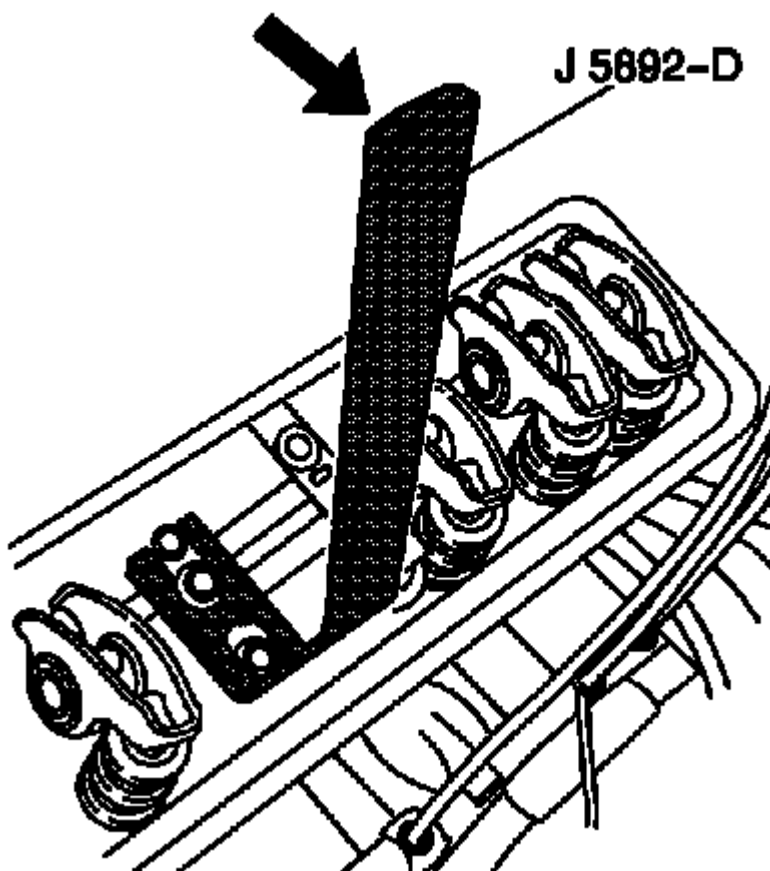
View Of Special Tool J 5892--D, Valve Rocker Arm Bolt & Washer
